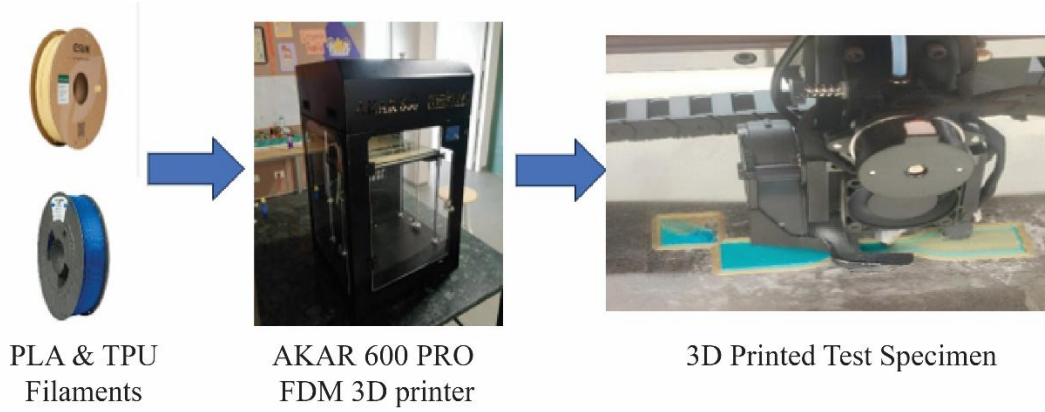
Fabrication of specimens using the AKAR 600 PRO FDM 3D printer
